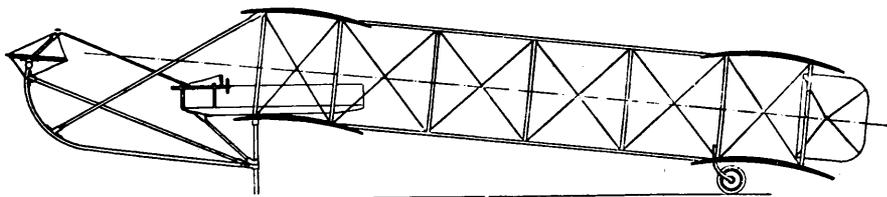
Elevation of latest type of Maurice Farman's biplane.
